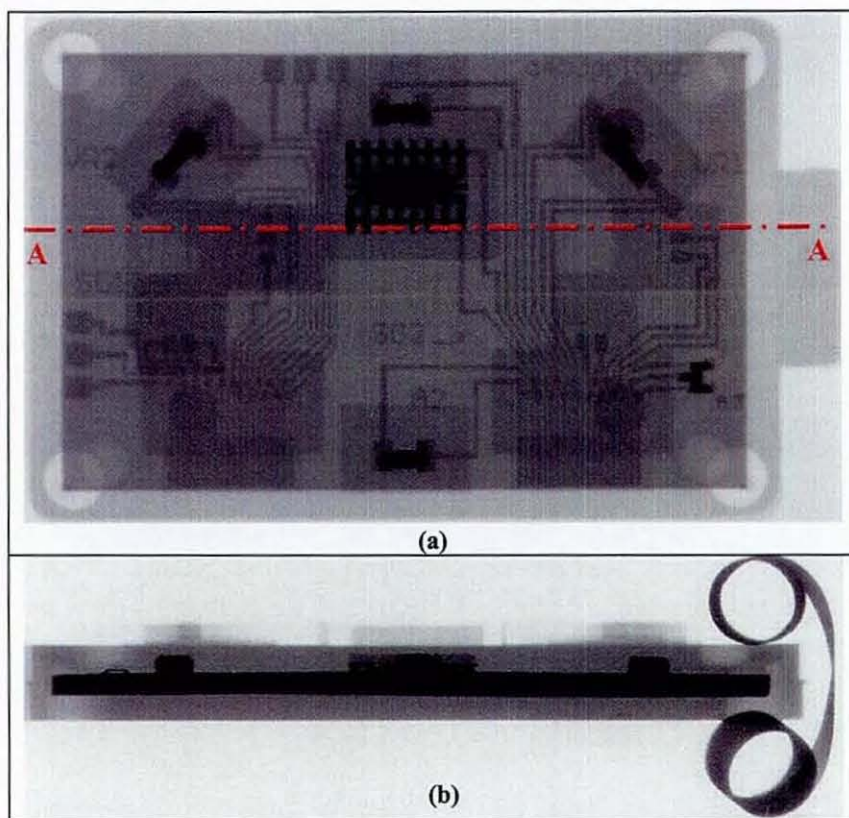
GR-PBT overmoulded sample with in-mould supported topographical tool
